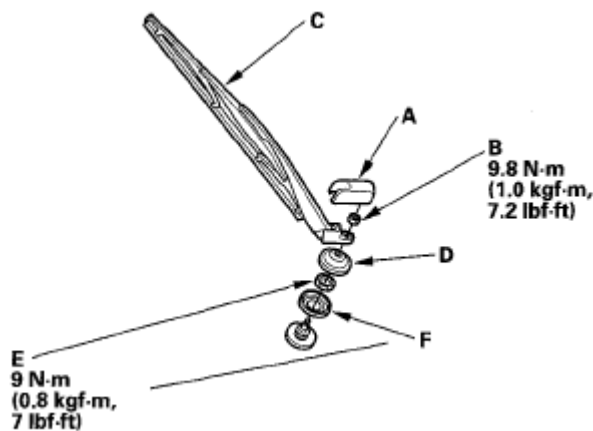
Identifying Rear Window Wiper Arm, Wiper Shaft Cap, Nut And Washer
